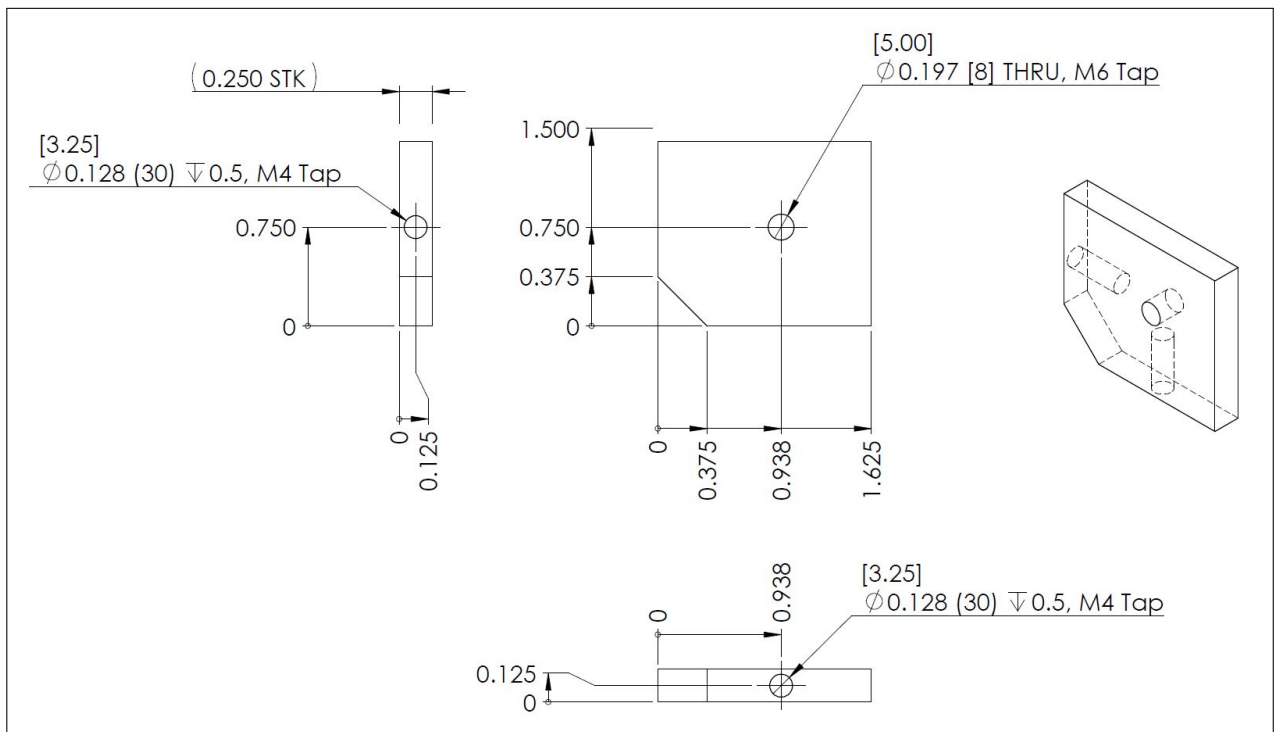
Force Input Device - Preload Plate Detail. Material: Aluminum. UNLESS OTHERWISE SPECIFIED, ALL DIMENSIONS ARE IN INCHES.
